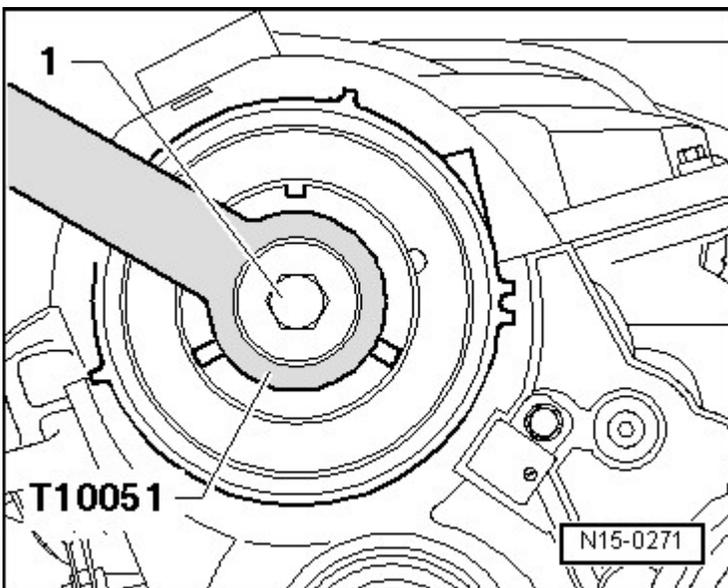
Identifying Camshaft Gear Counter-Hold T10051
